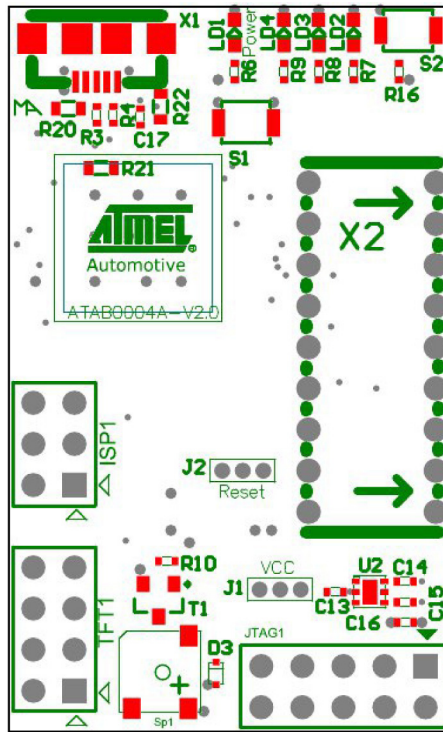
PC Interface Board Component Placement; Bottom side, Top View (as if PCB was Transparent)
